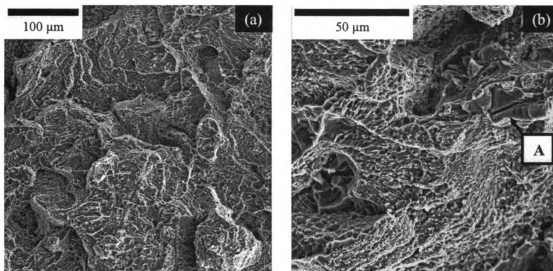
SEM micrographs showing (a) global fracture morphology; and (b) brittle cracks (indicated by 'A') among dimpled fracture surface of a W-alloyed eutectic butt-joint that failed under tensile loading.
